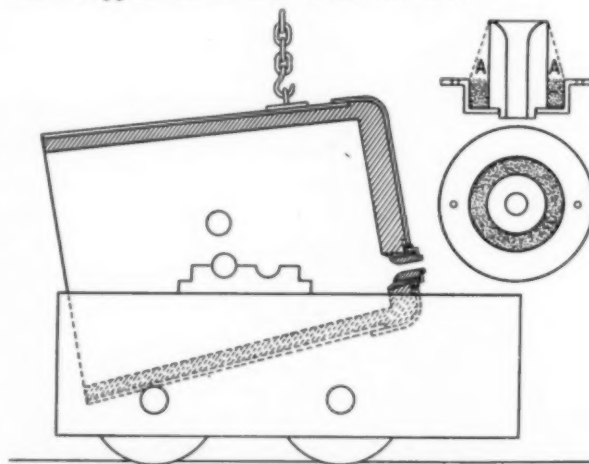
Ladle in position on the carriage for changing the nozzle pot. The nozzle casting is shown in plan, and section with the nozzle fixed. At the point A the nozzle brick is well daubed over with fireclay before inserting.
